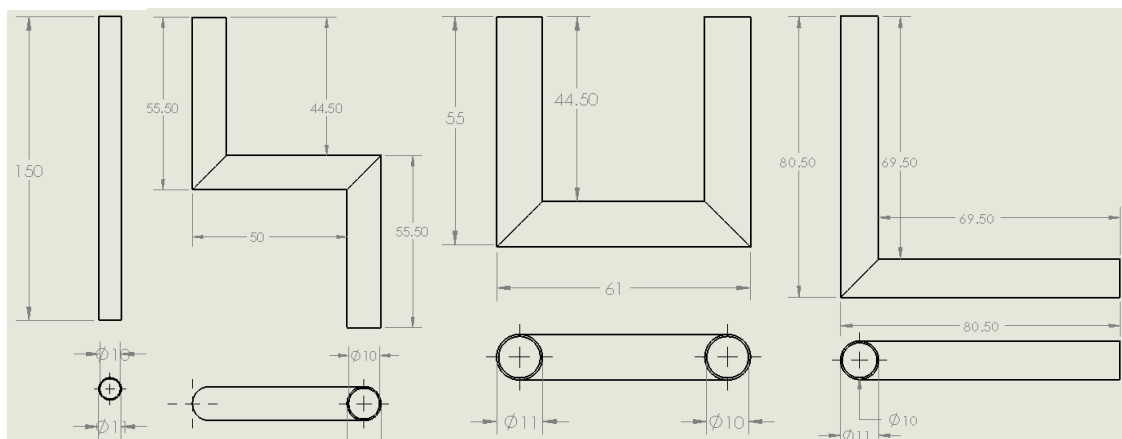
showing the dimensions of the different tubes with the dimensions shown in mm
